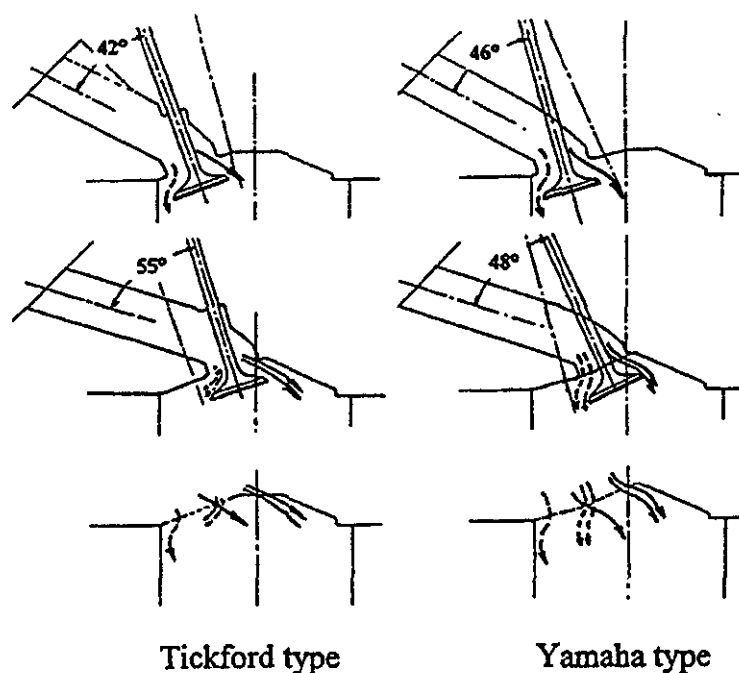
Tumble generating flows in Yamaha 5-valves per cylinder design
